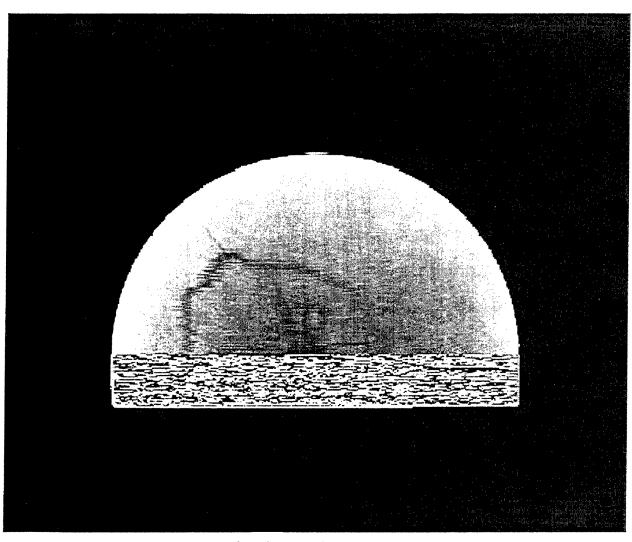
21.40 mm from bottom of disk with 65° rotation about X-axis.
